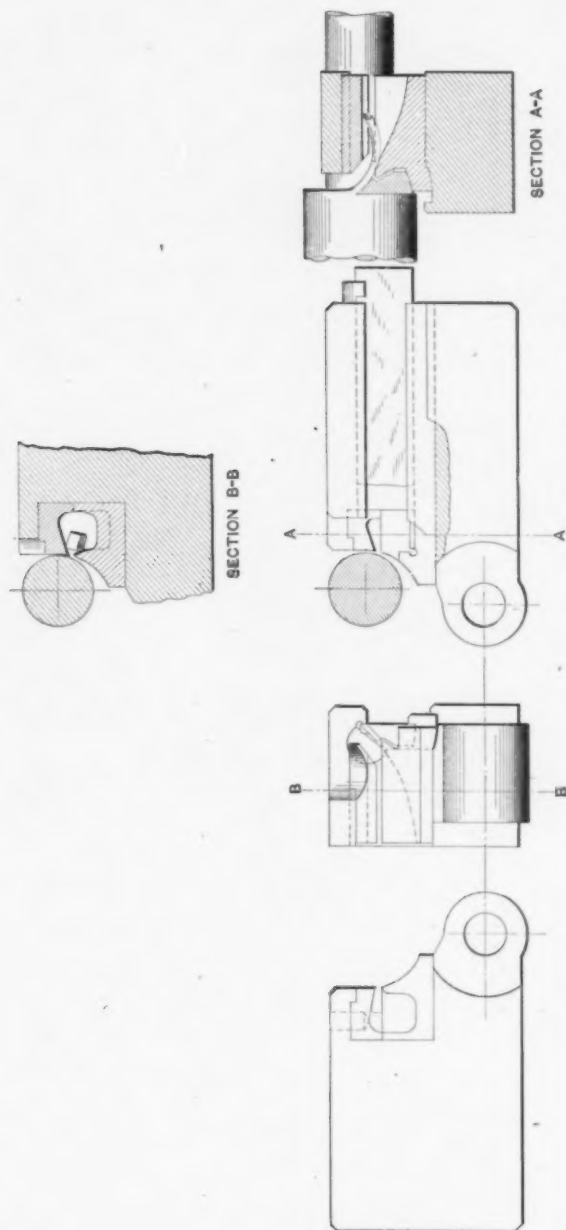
DETAILS OF TURNING TOOL SHOWING CHIP BREAKER FOR A CURLING CHIP
